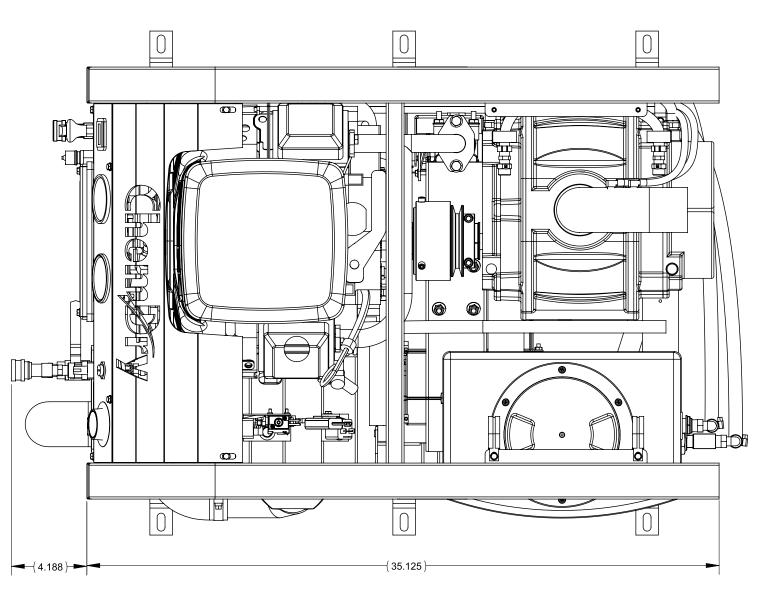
Console Assembly - View 5 of 5 610-050-747 Rev. A
